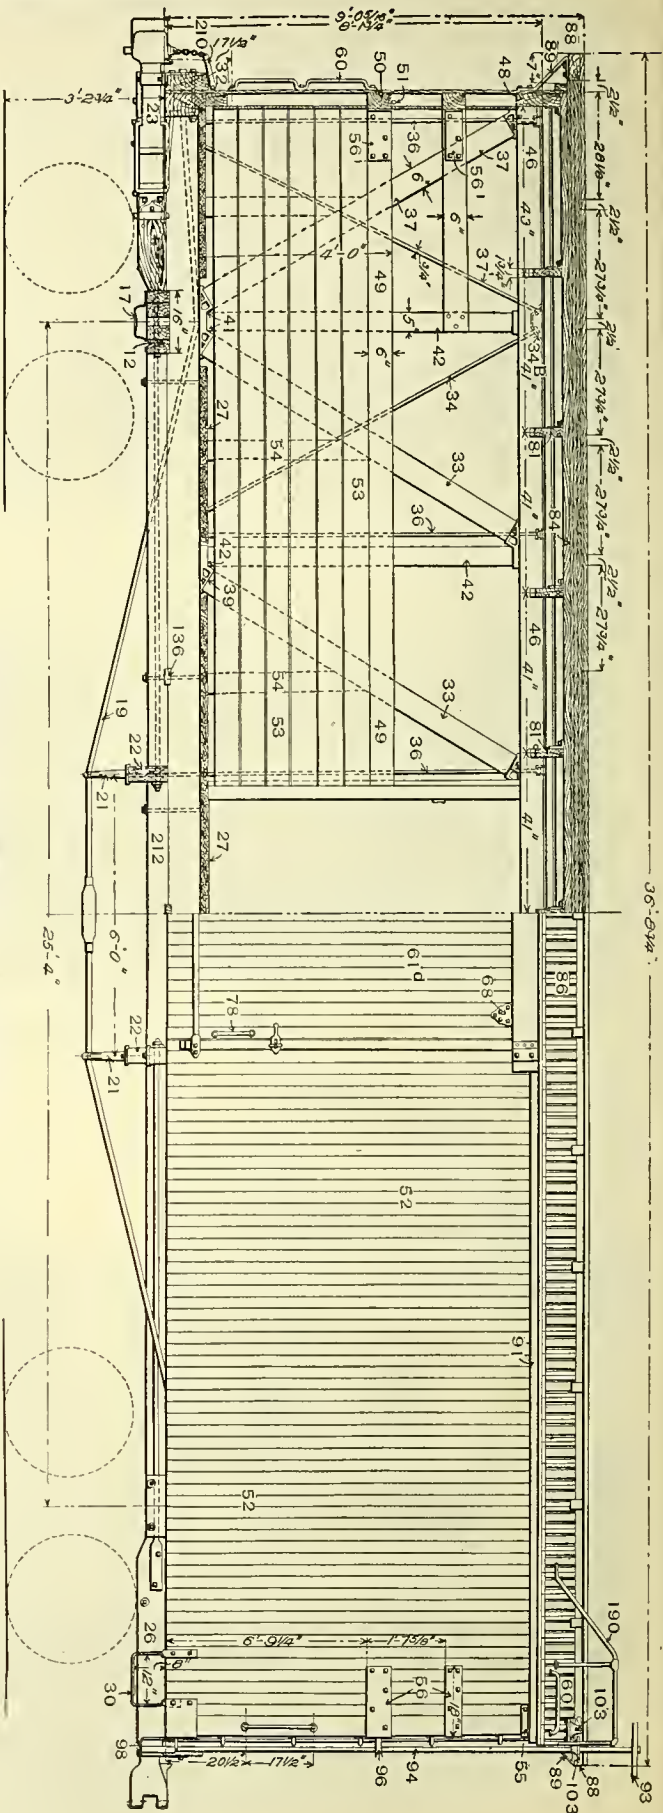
Half Longitudinal Section and Half Side Elevation.
